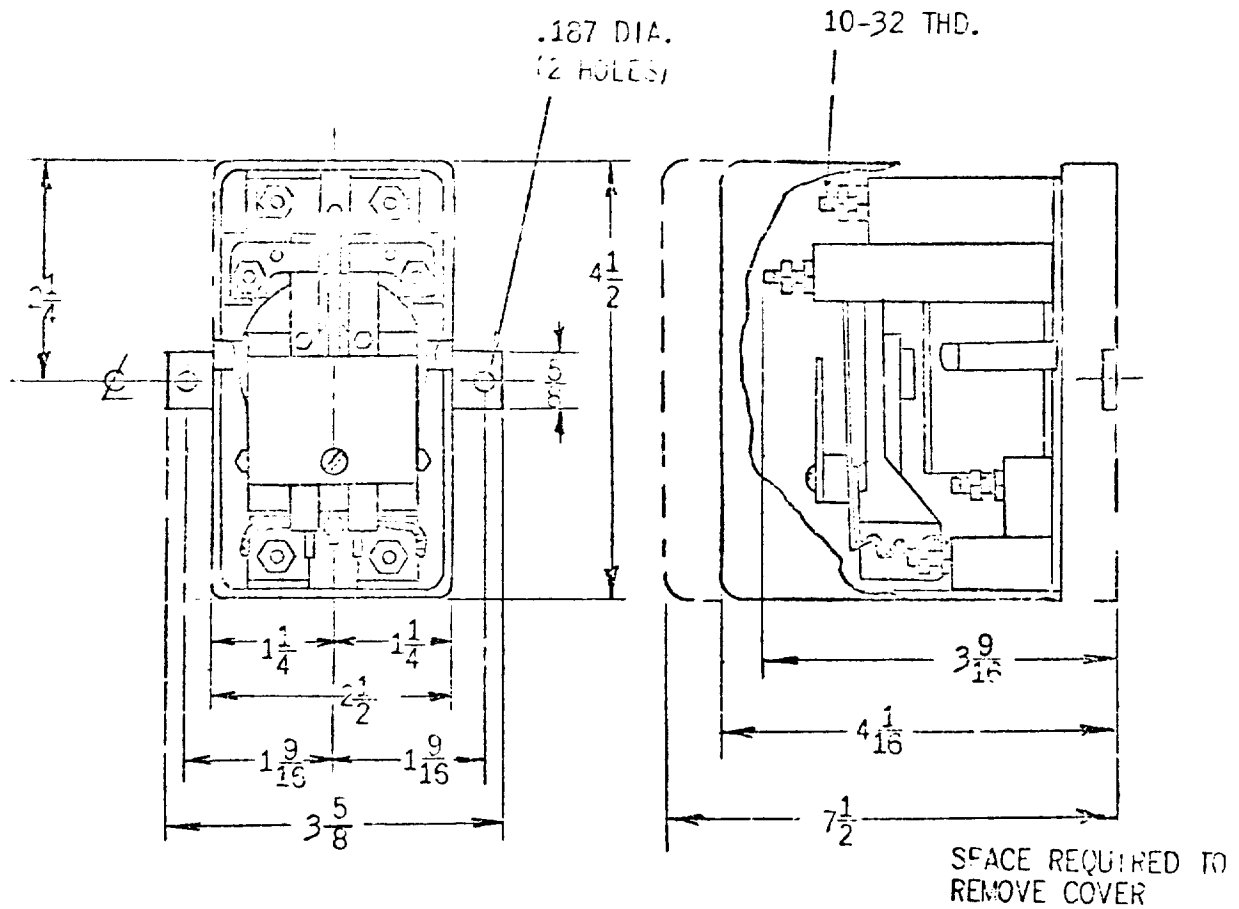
(0165A7757-002) Outline and Panel Drilling for Front Mounting of HGA17S and HGA17T Relays
